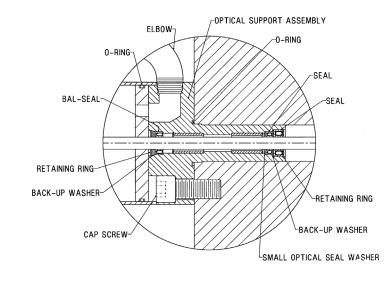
Optical seal support assembly - 8" and 18" and all units built prior to January 1, 2006
